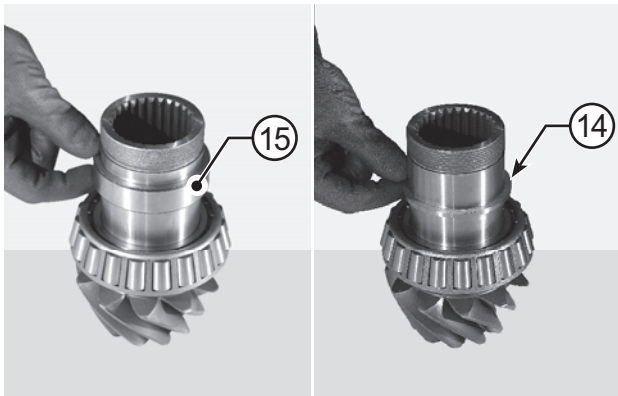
Remove spacer (15) and calibrated spacer (14).
